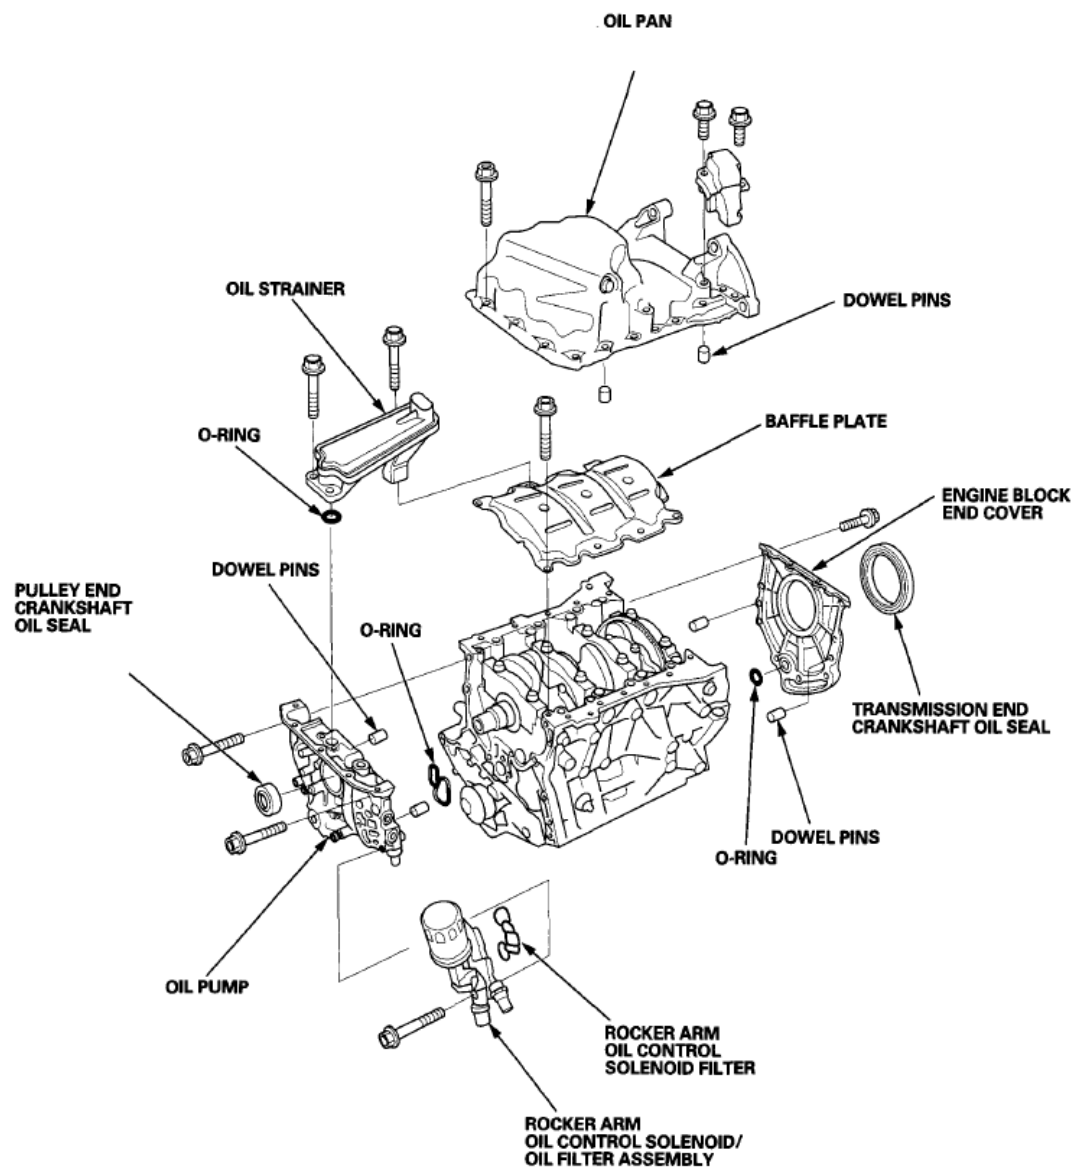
Exploded View Of Engine Block Components (1 Of 3)
